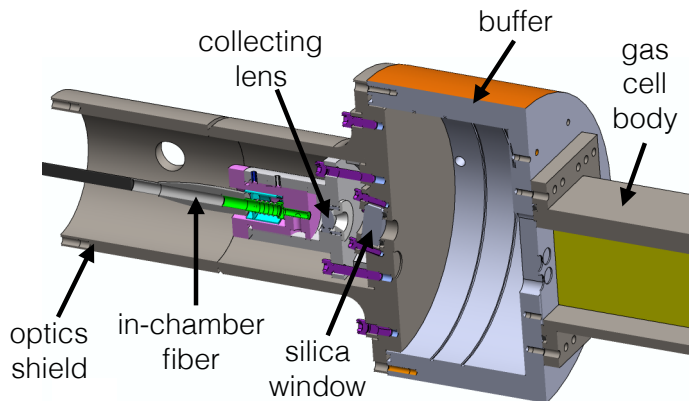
The optics assembly of the WDPE gas cell. Major hardware components are identified. This optics assembly is mounted on the buffers identified in Fig. 3.9
